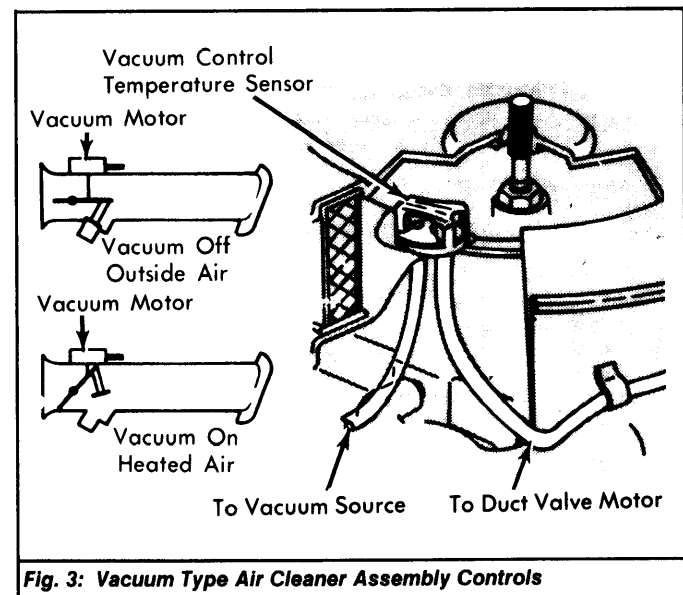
Vacuum Type Air Cleaner Assembly Controls
